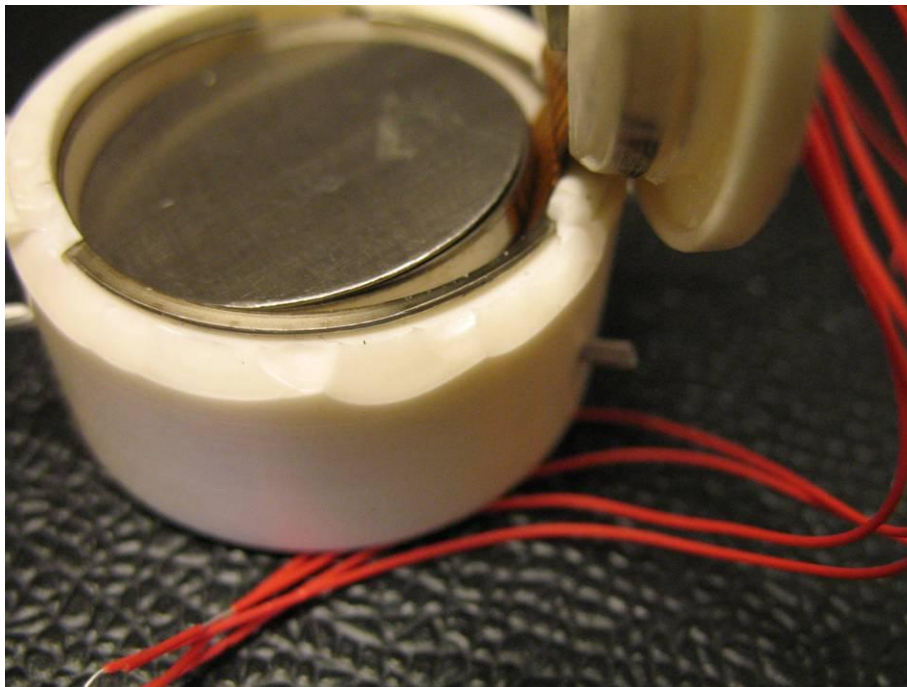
Seal base fracture during assembly. Picture courtesy SNL.
